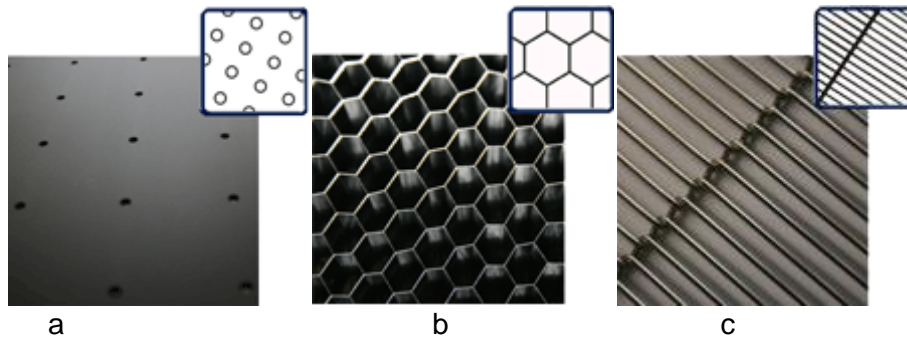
Cutting surfaces: perforated metal plate (a), honeycombs (b) and lamella (c)
